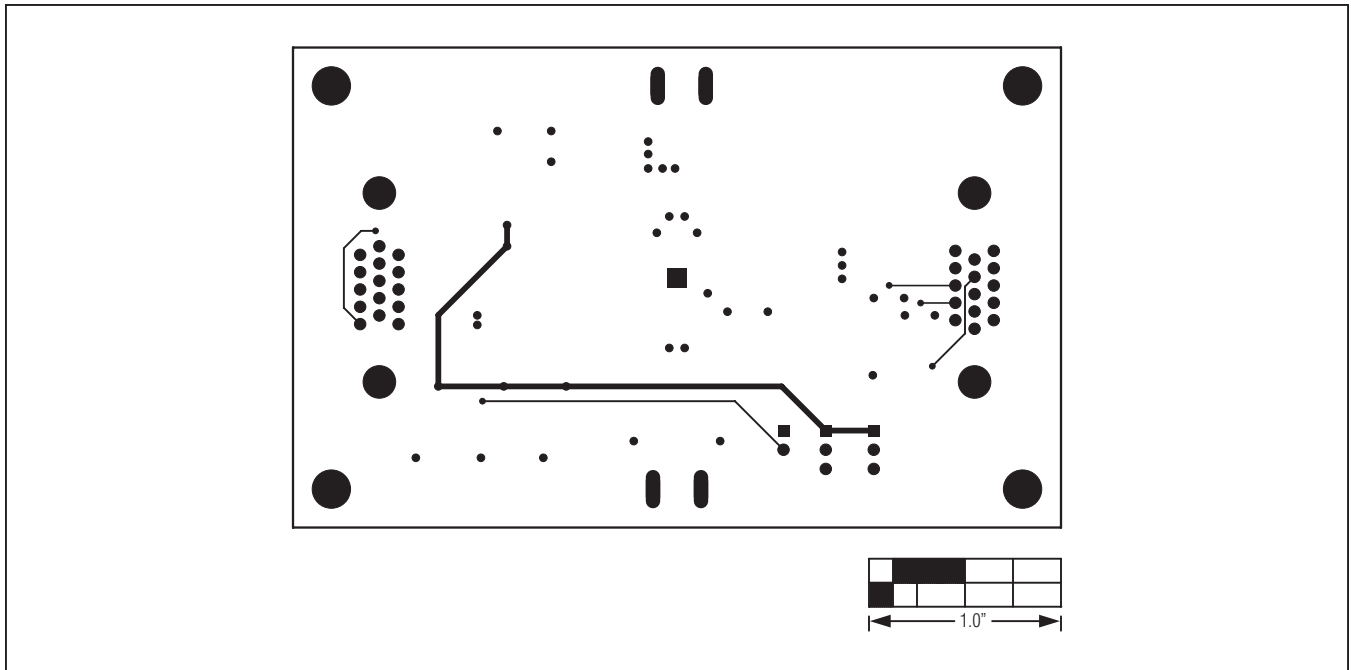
MAX14984 EV Kit PCB Layout—Solder Side
